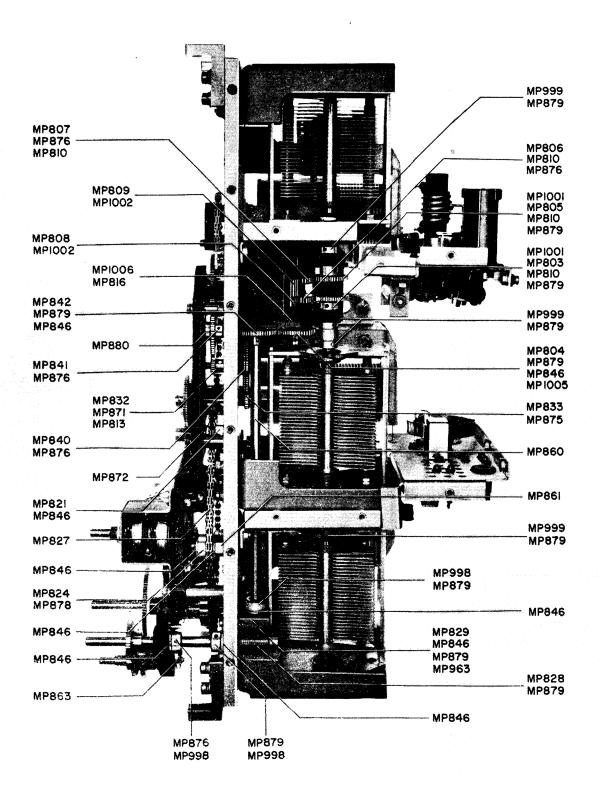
Driver Gear Train, Location of Parts in Righthand Side
